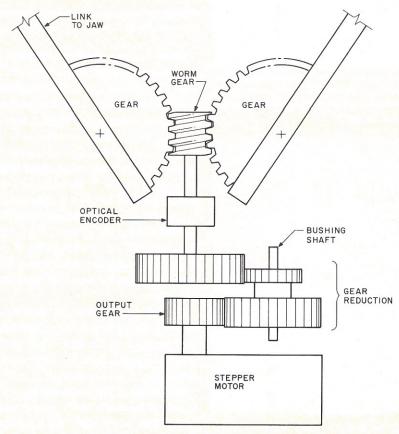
Mechanical schematic of the general-purpose gripper shown in Photo 1.
